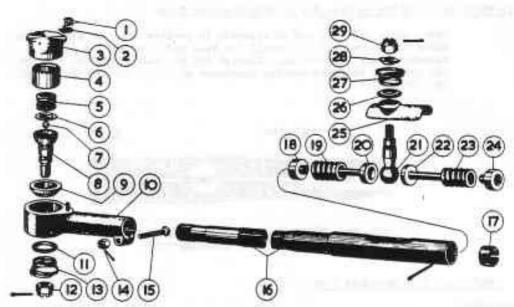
FIG. HA. SIDE STEERING TUBE, "EXPLORED" VIEW.
